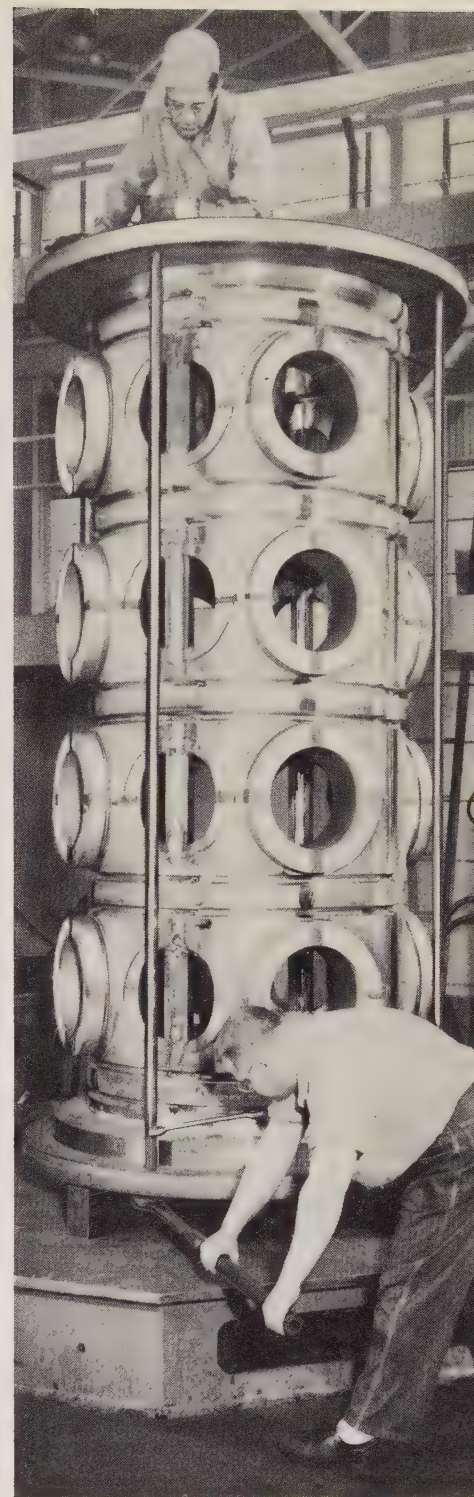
Trunnions are assembled to the crankcase assembly to support it in the welding fixture while interior welds are made.
